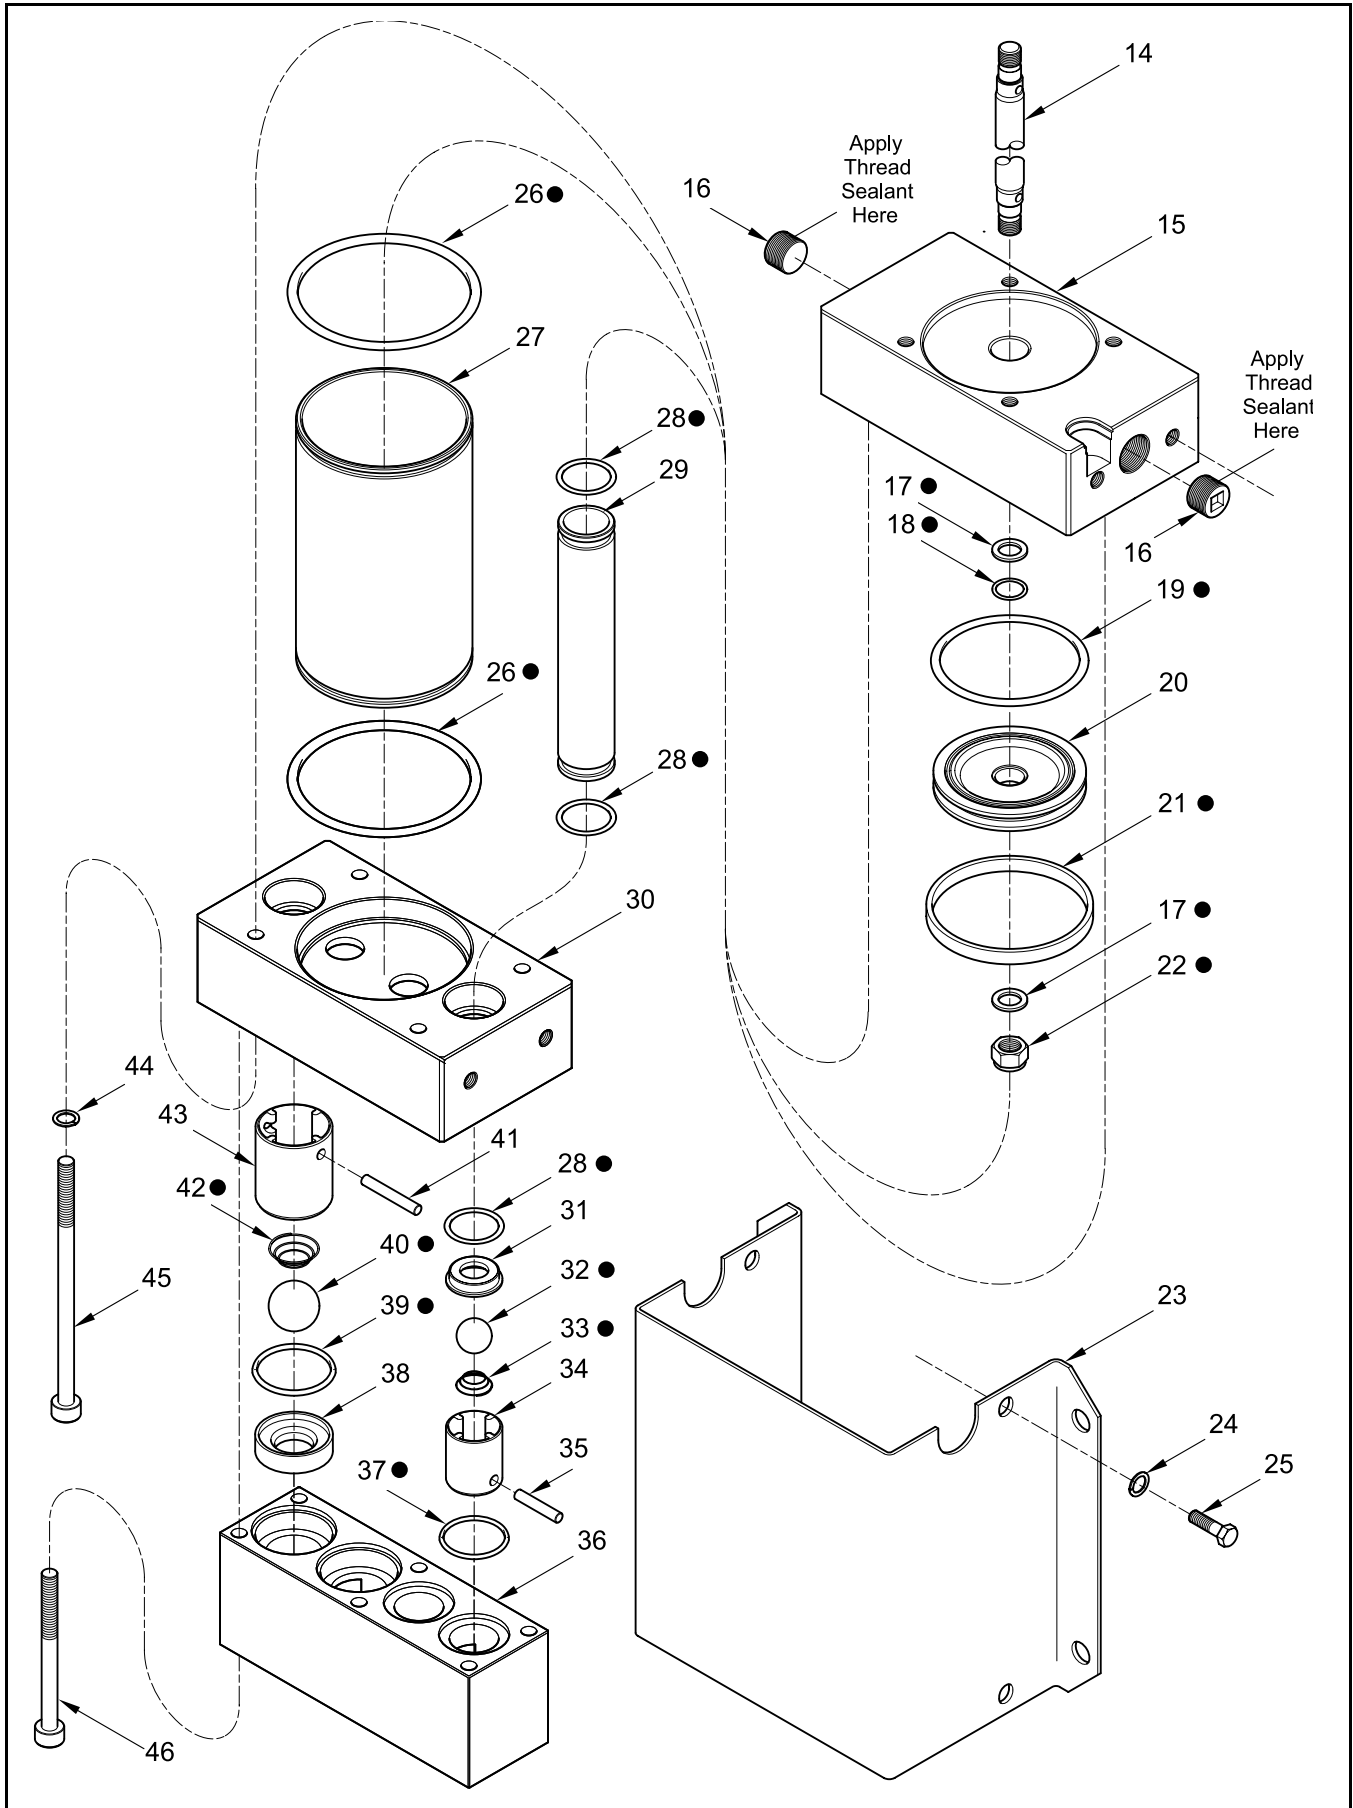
B Fluid Evacuation/Transfer Pump Model 9920- Exploded View
